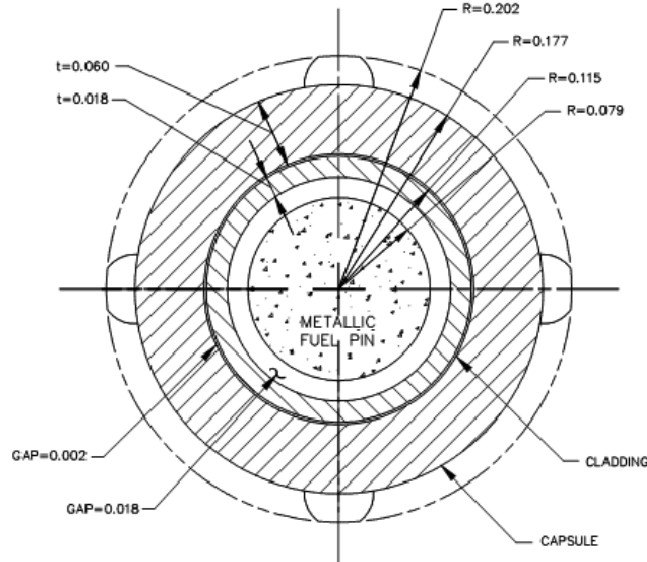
Radial dimensions of capsule and fuel rodlet assemblies for the AFC-2 metallic fuel tests.
